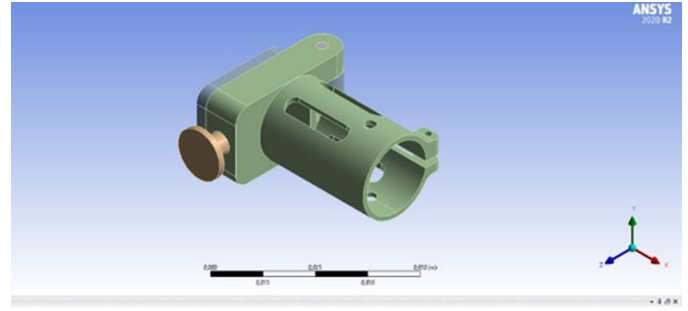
Foldable arm and motor mount assembly as modelled in ANSYS, in wrought 6061-T6 aluminium.
